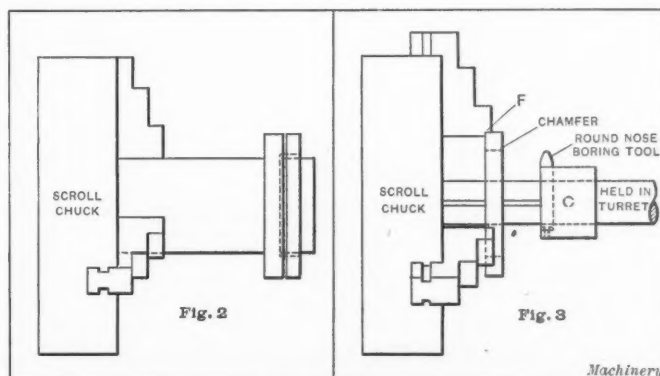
Bar reversed in Chuck Fig. 3. Tooling for boring Nut Blanks
